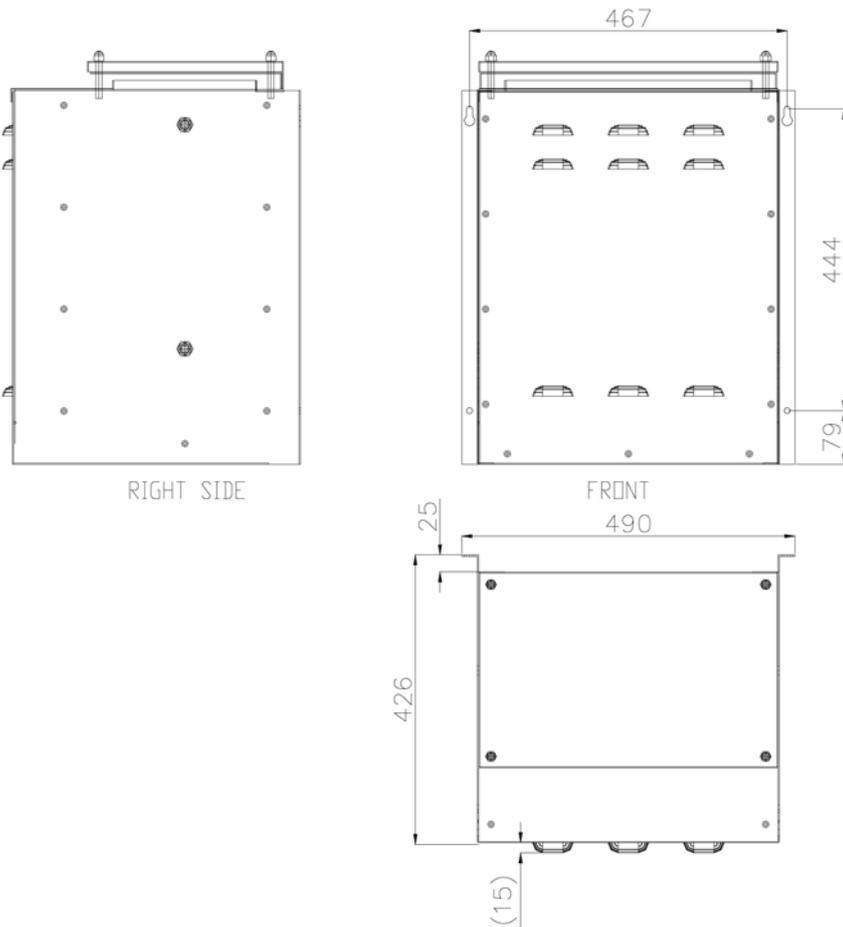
Main dimensions of the steering brake resistor for Azipod CO
